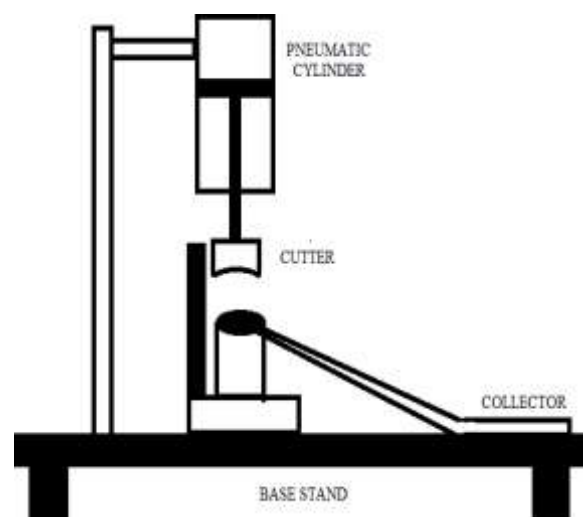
Design of Pneumatic sugarcane bud cutting machine
